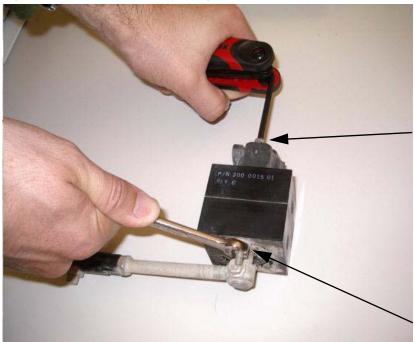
Linkage Rod Ball Joint Bolt (Different Vehicle Shown)
